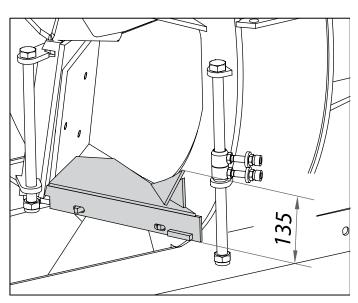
Installation of the fitting blocks HF260-EM, HF260-EL and HFC260
